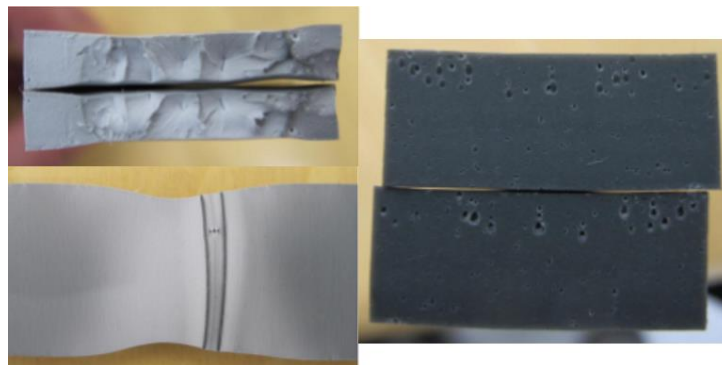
Fractured and Un-fractured PVC Sample (cross-sectional view) [29]
